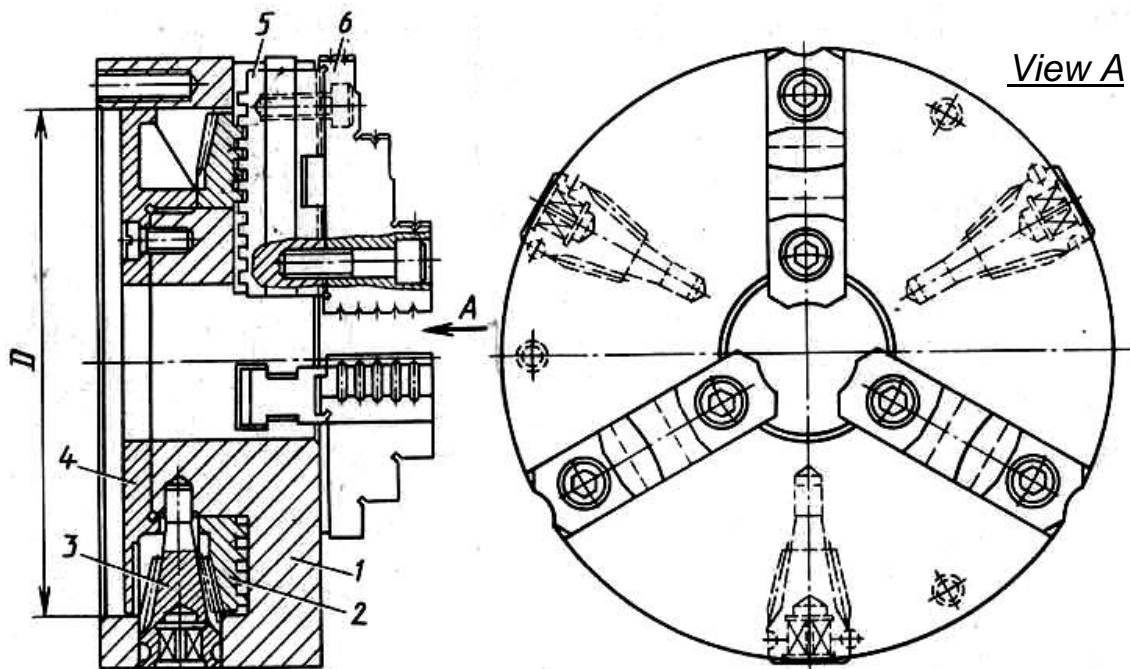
Self-centring three-jaw chuck with spiral-rack drive mechanism
